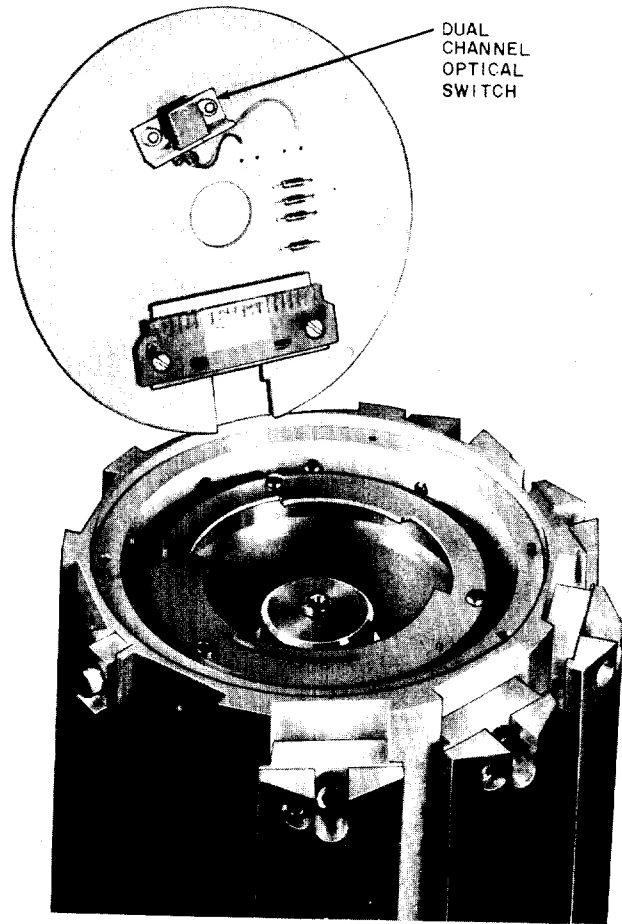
L-509855-2 Optical Switch Assembly—Used With All KS-20951, L3 DSUs
